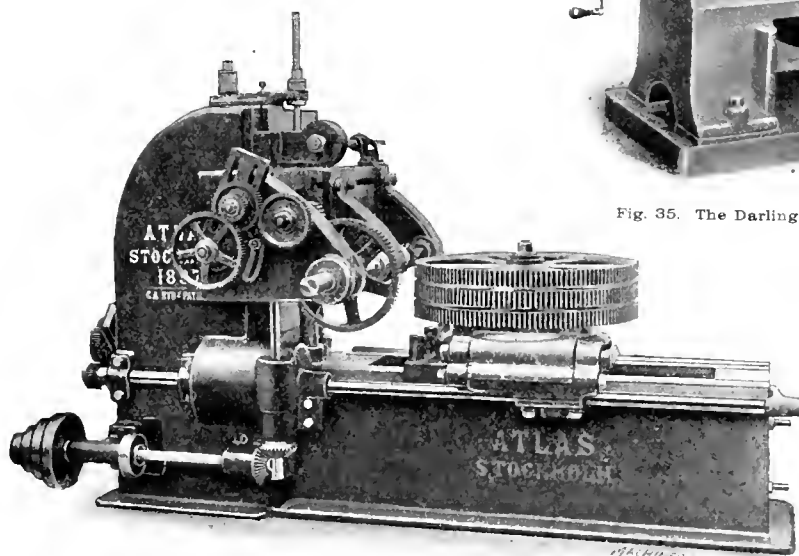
An Example of Swedish Design—The Atlas Machine, as arranged for Cutting Spur Gears.
